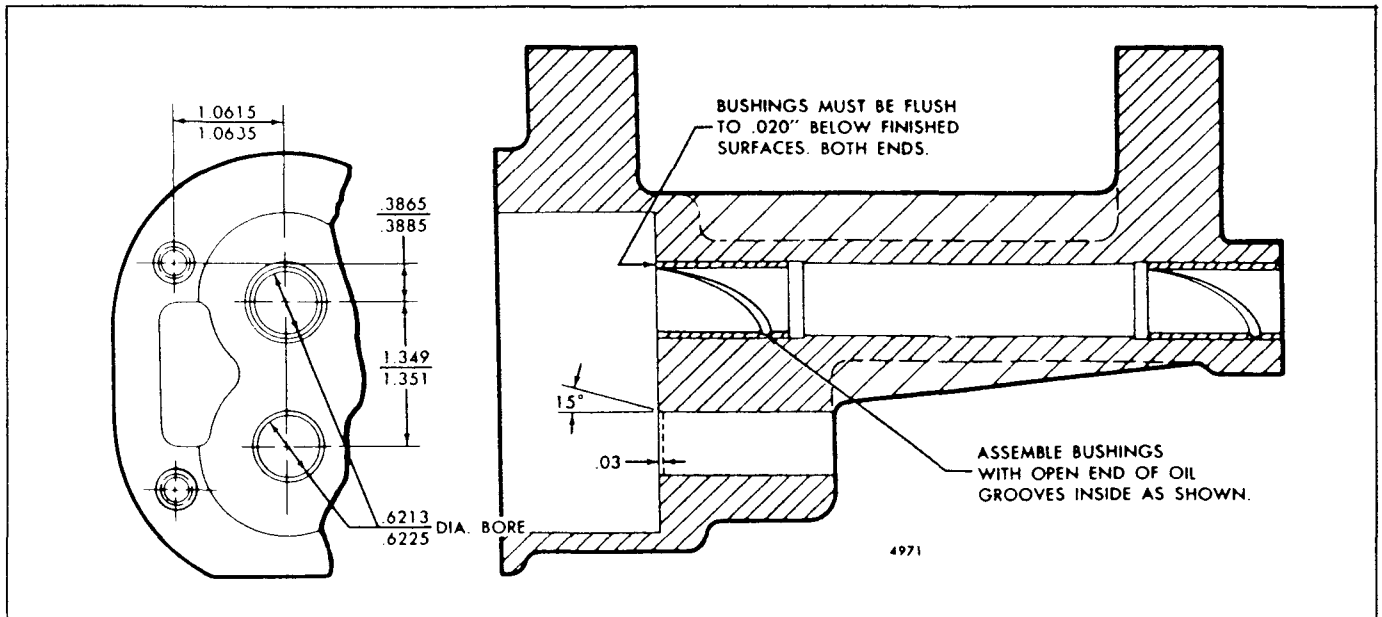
Diameter and Location of Bushings in Oil Pump Body
